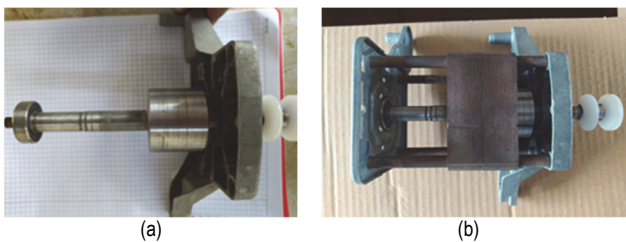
Parts of the first flywheel (a) First flywheel and bearings (b) First flywheel mounted in the safety cover
